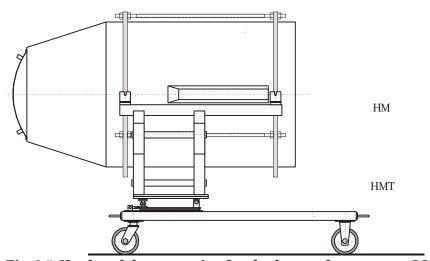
Head module preparation for checkout and transport to LV ATB
